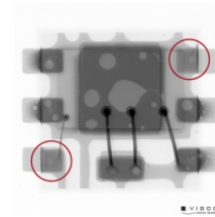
printing with fail DFN2020MD-6 (SOT1220) with tin-plated wettable side pads (3-D160): Solder paste
